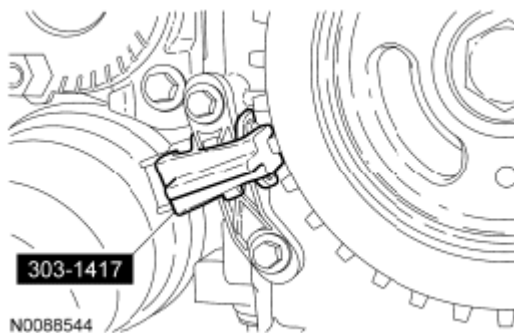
Adjusting CKP Sensor Using Crankshaft Sensor Aligner
